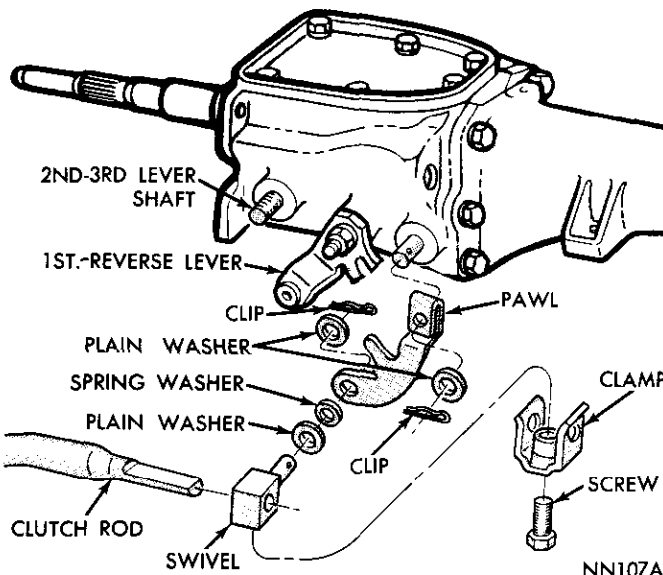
Gearshift Interlock (6 cyl. & A903 Trans. Only)
